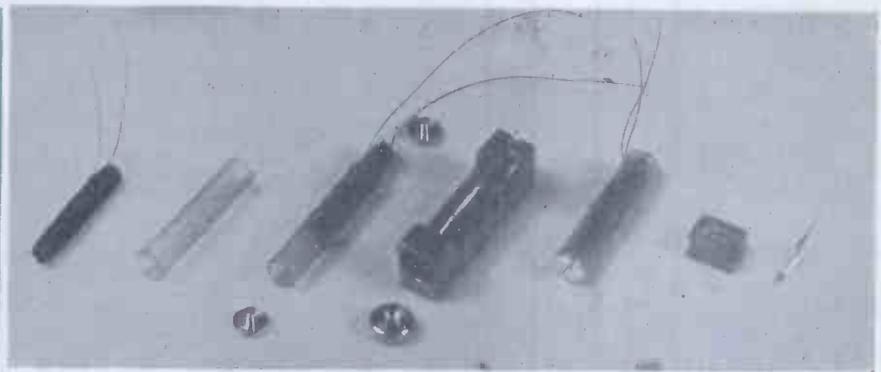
Assembly of moving coil unit, showing (left to right): Coil, tube, coil partly inserted, coil carrier and completed coil needle holder and needle.
